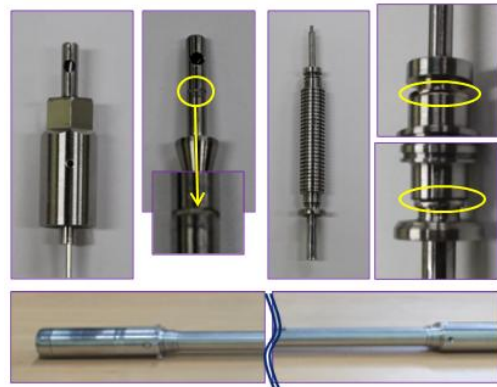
Dual Cooled Fuel Irradiation Rig Laser welding
